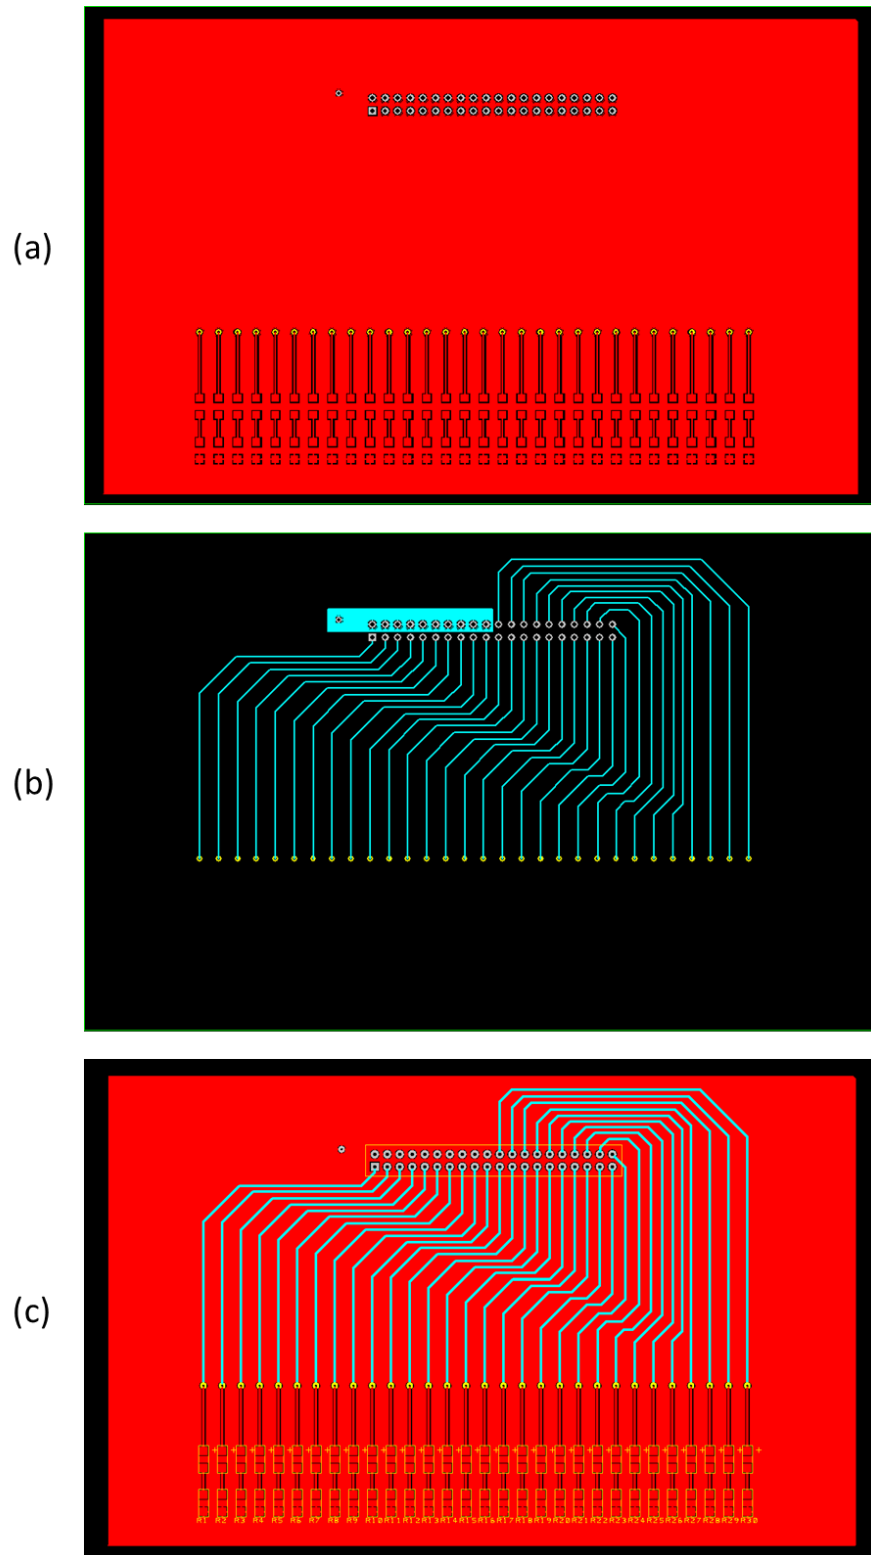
2-layer PCB layouts of LED indicator for linear array. (a) Top layer. (b) Bottom layer. (c) Stack-up layout.
